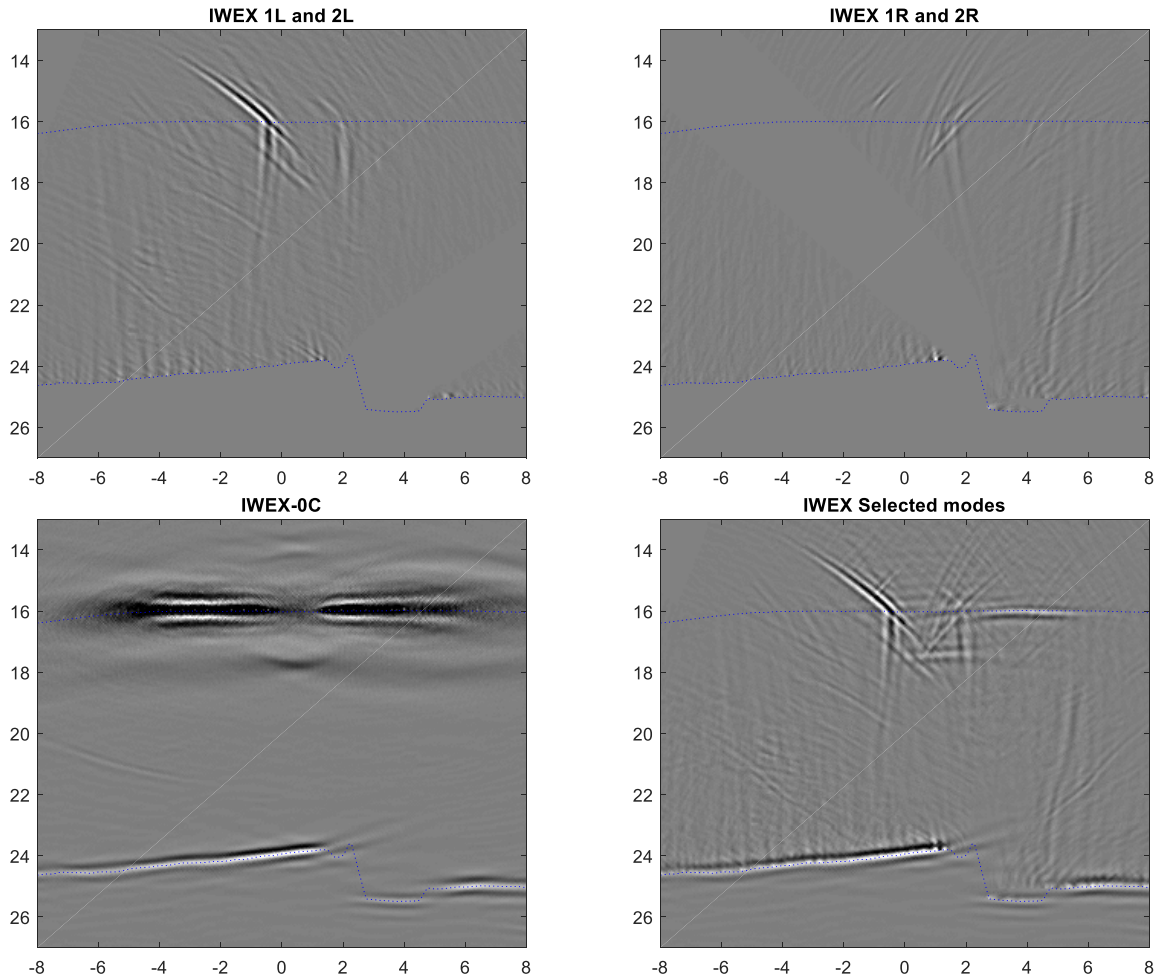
, Immersion IWEX measurements of a 22" pipe, ERW weld, 8 mm wall-thickness, with an OD notch.
